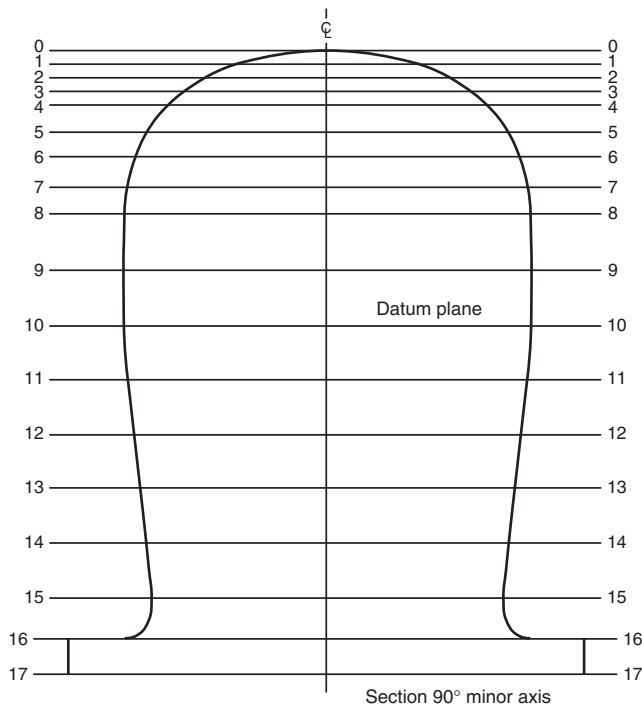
(c) ISEA size 7 headform, front.
